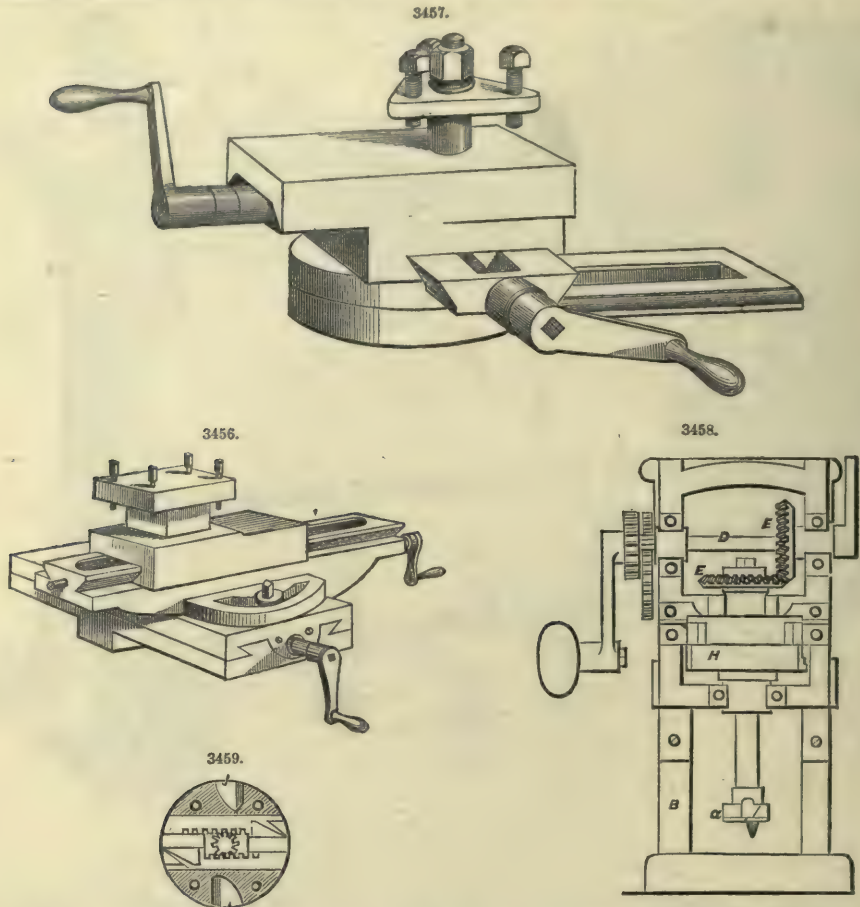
, having cutters on opposite sides so arranged that when the main shaft rotates, the inner shaft, by the operation of the travelling truck in the cam, turns one-half way round, causing the cutters gradually to project from the life of the circular hole to the angle, as at J J; the operation of the two cutters being simultaneous, the angles are thus cut to form the angular hole.
